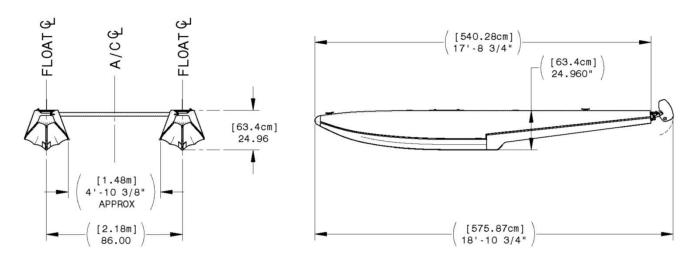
2200 Twin Seaplane Floats (TSO Assembly)
